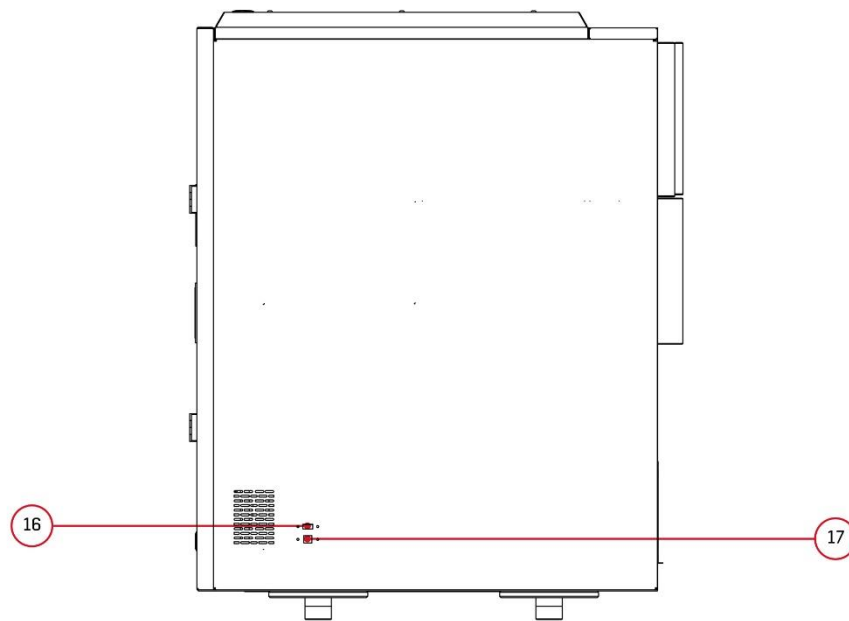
3DGence INDUSTRY F340 printer – right side view
